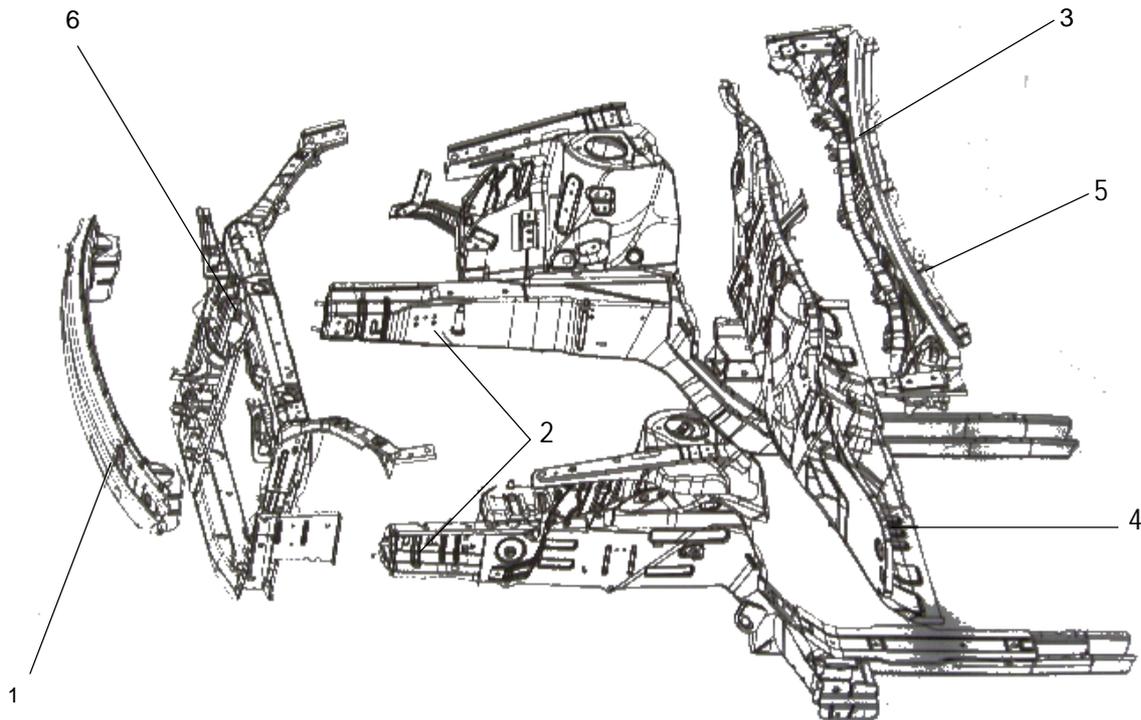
Engine Compartment Assembly & Front Wall Parts
